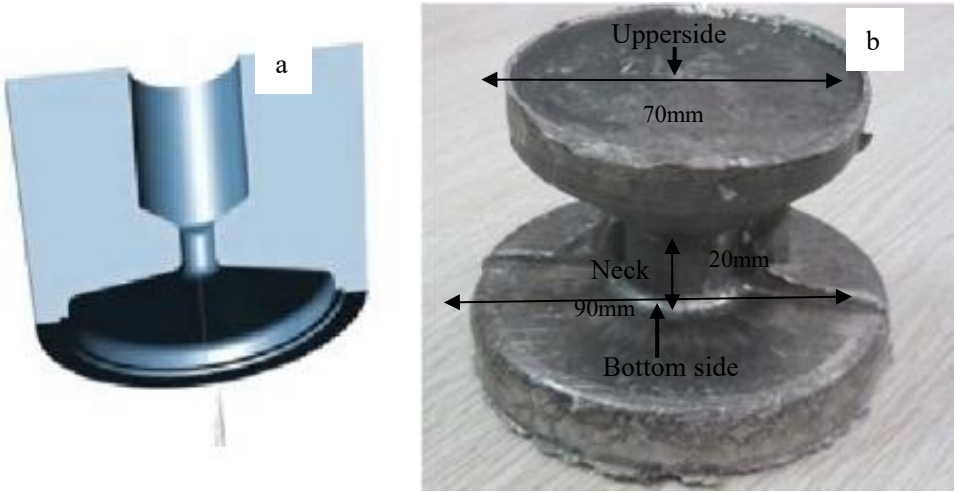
3D figure of extruding mold and real semisolid extrusion casting sample, a) extruding mold, b) extruding sample
